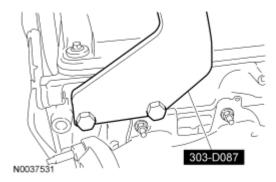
Installing Special Tool To RH Cylinder Head Courtesy of FORD MOTOR CO.
